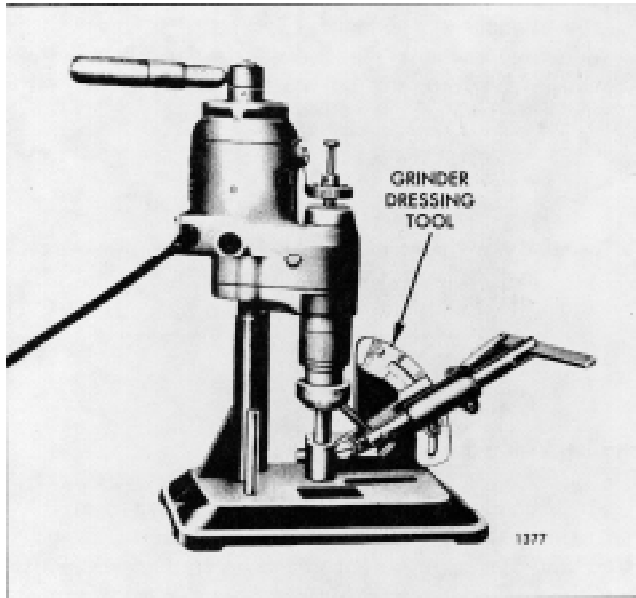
Grinding Wheel Dressing Tool of Set J 8165
